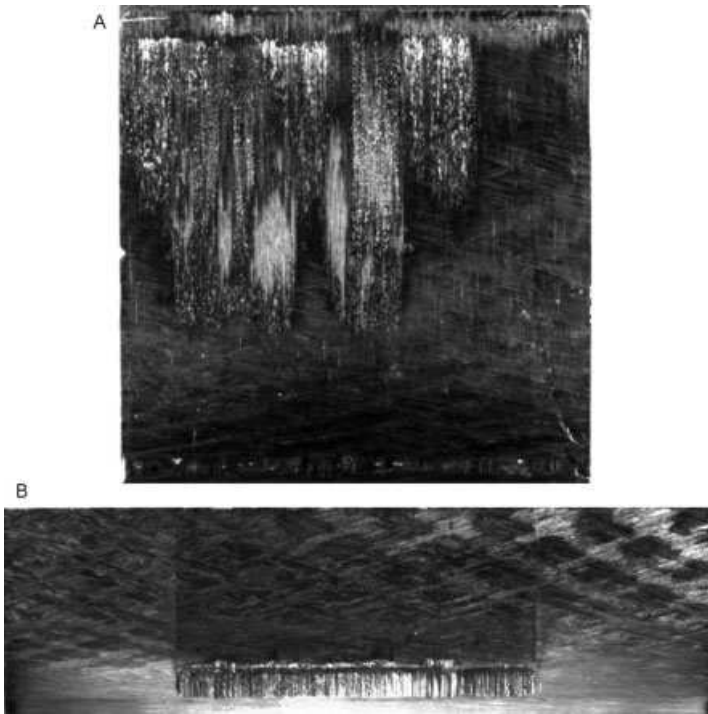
Pinion and wheel with shave edge at tooth tip (A10-type, high-EP scuffing test). A. Pinion flank. B. Corresponding wheel flank.
